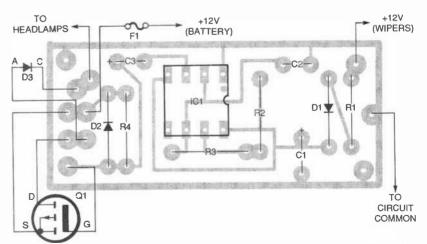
Use this parts-placement diagram as a guide when assembling the Control board. The pins of QI and D3 are labeled to make off-board assembly easy.
